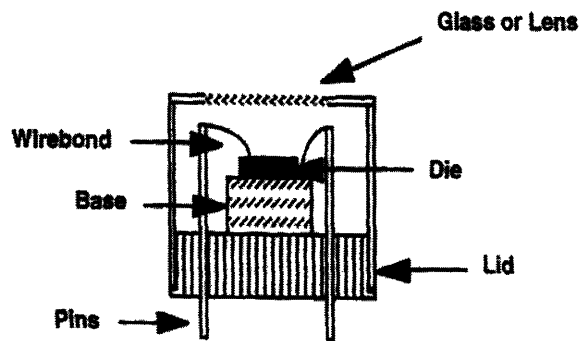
Schematic cross-section view of photodiode optical subassembly package [5]
